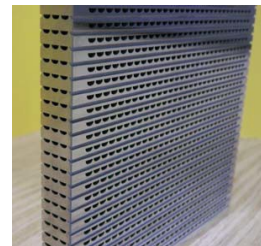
Formed plate heat exchanger with fusion welded edges.
